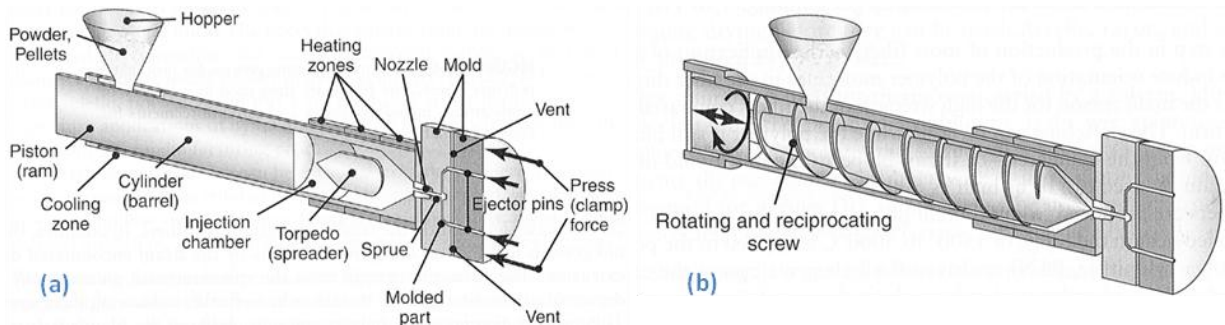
(a) Plunger injection molding and (b) reciprocating rotating screw injection molding.
